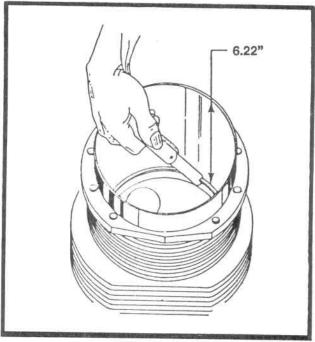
B. MEASURING RING GAP IN CYLINDER.
